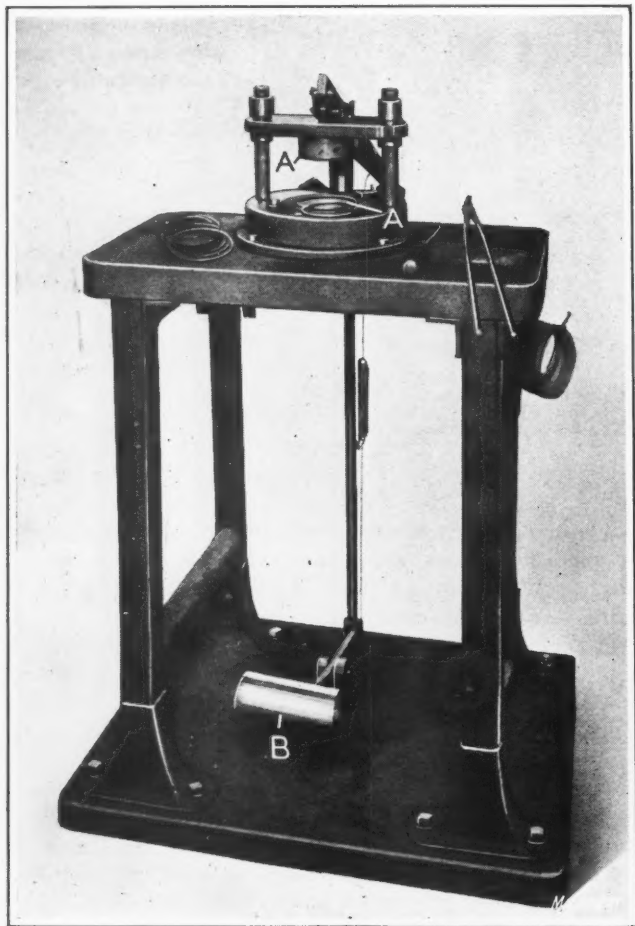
Combination Straightening and Tempering Die used in making the Inner Rings
